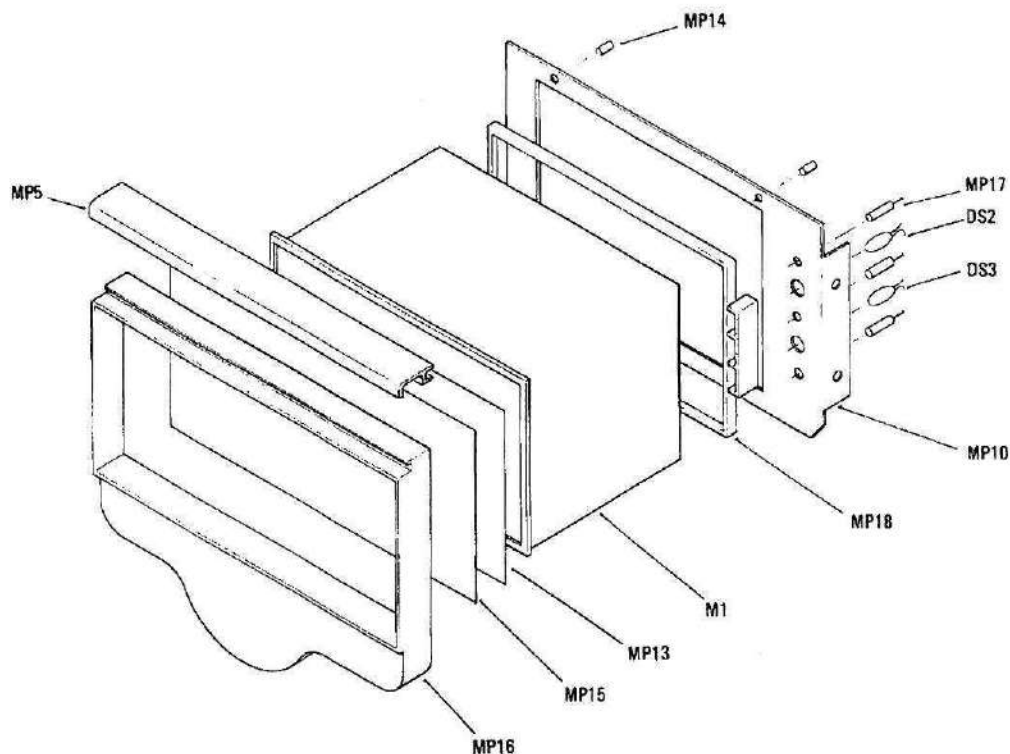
Panel Meter Components, Exploded View, Backdating (P/O Change J)
